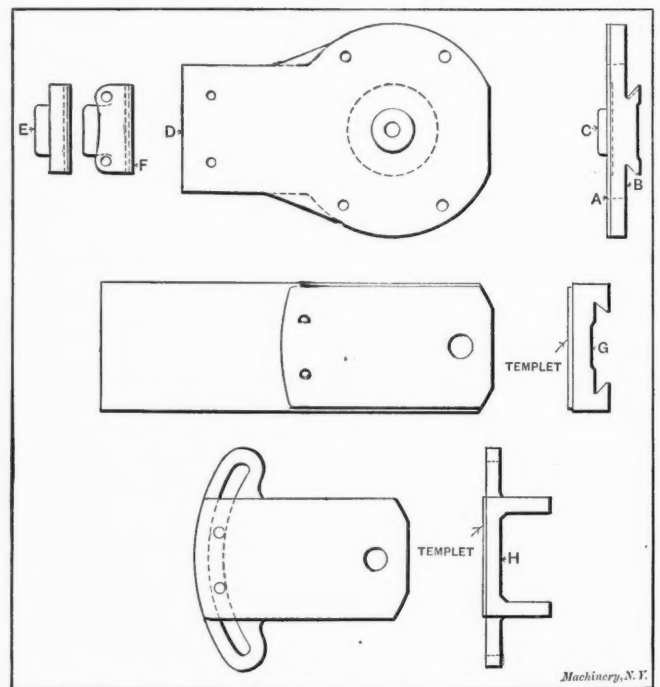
Sheet Iron Templets for Laying out Planer Crossrail Members
